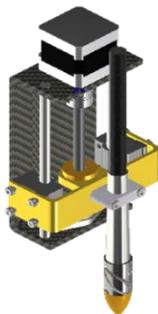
Z-Axis Unit (Torch Lifting Mechanism)
